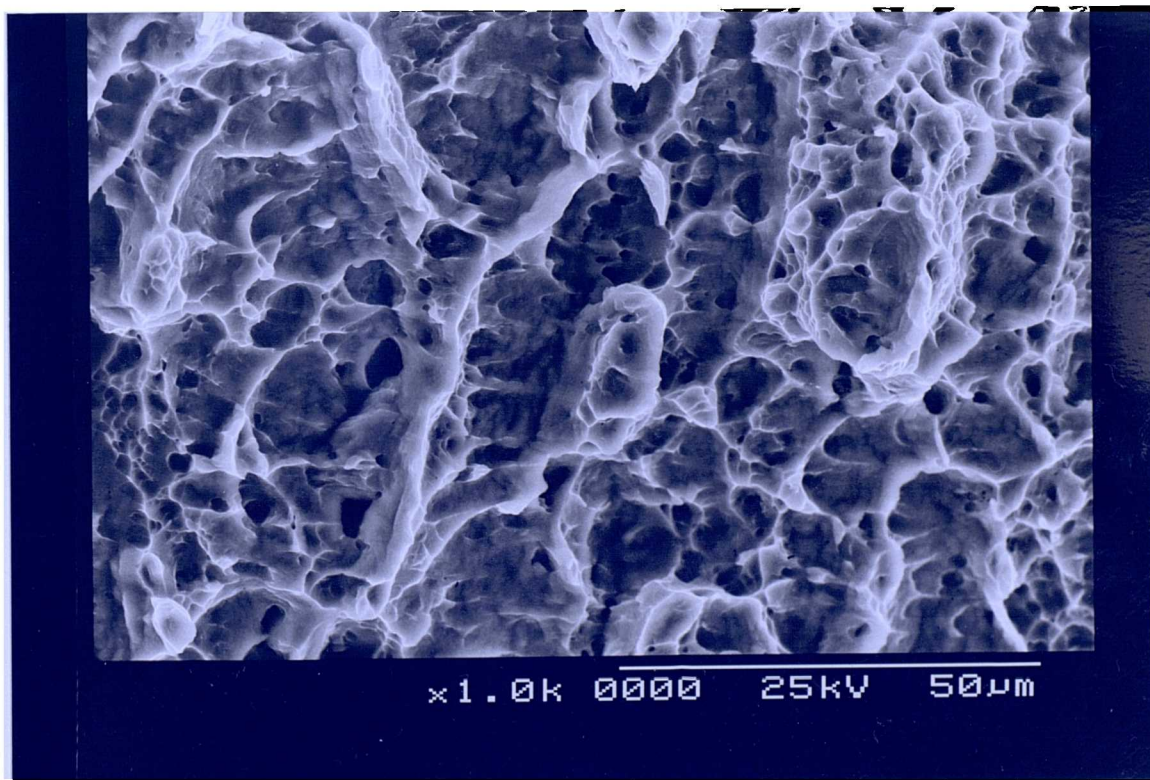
Fracture Surface Of Weak Weld (α : 3 mm, f = 15 Hz, P_{fr} : 36.3 MPa - experiment A9)
